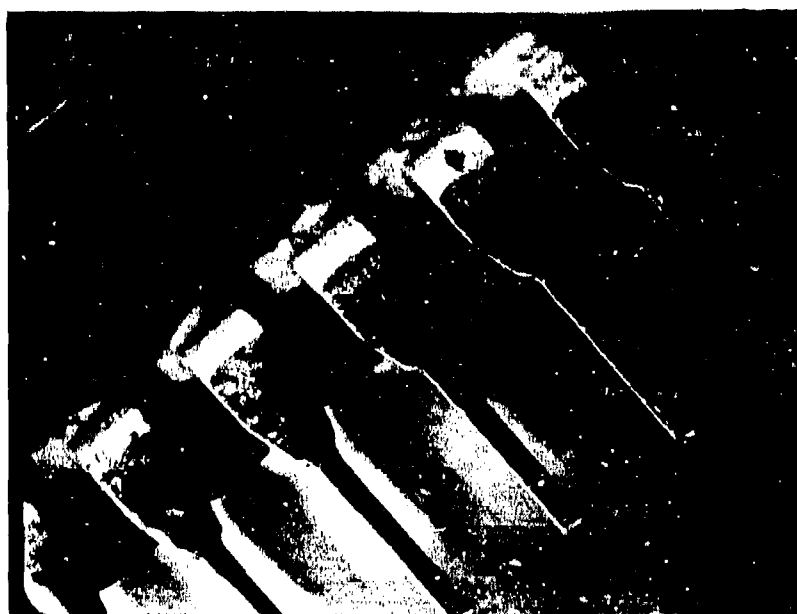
IC lead consisting of solder over Kovar that exhibited acceptable solderability after 16 hours.
